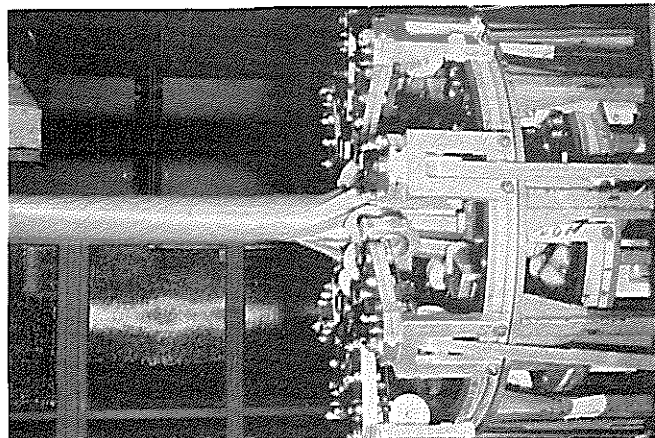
MACHINE FOR WINDING GAZELLE STABILIZER SPAR TUBES
